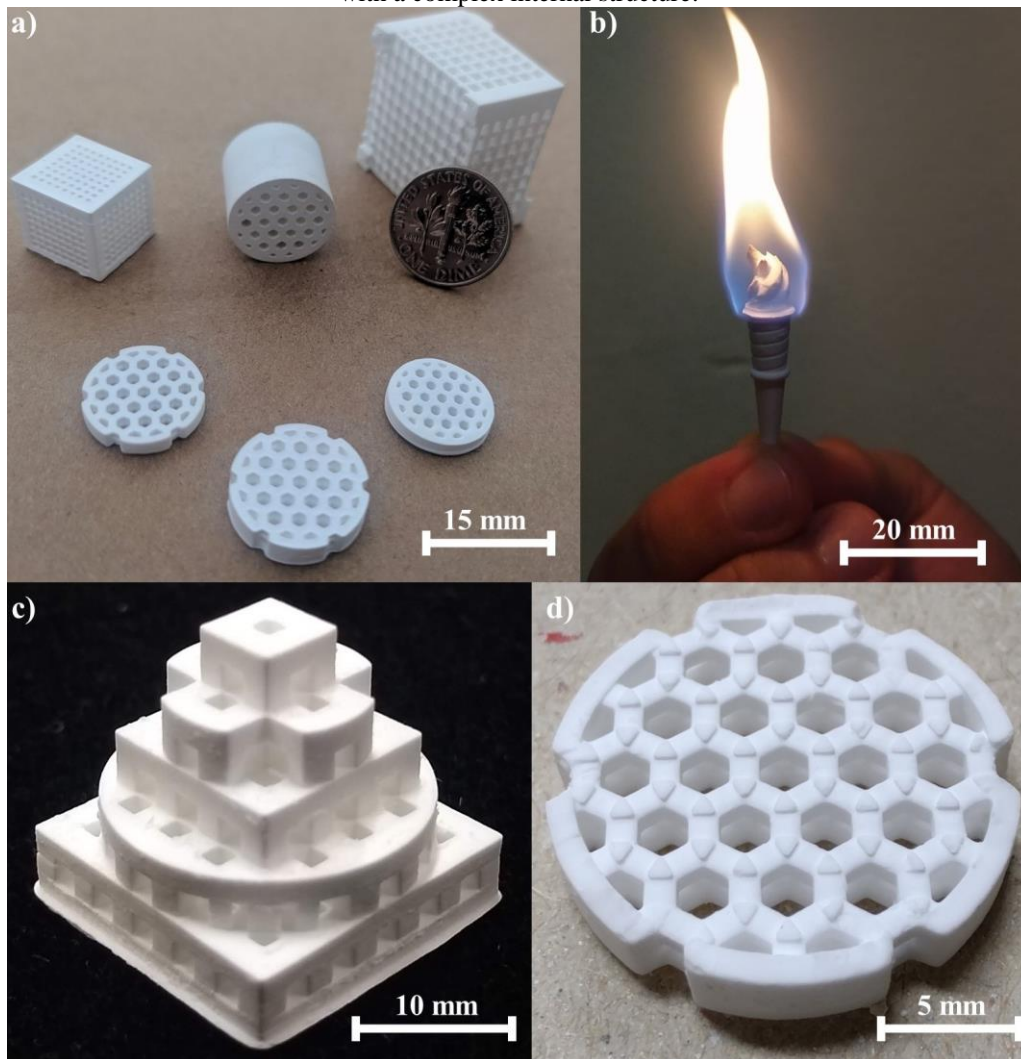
Mullite green parts manufactured in the DLP 3D printer prototype.
